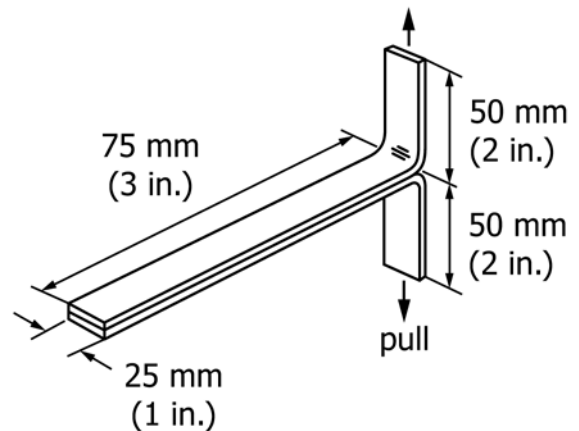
Configuration and Dimensions of a T-Peel Specimen
